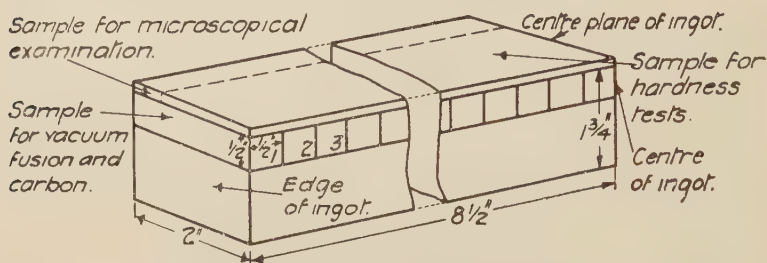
Ingot No. 6, Cast H3906. Method of taking samples.
